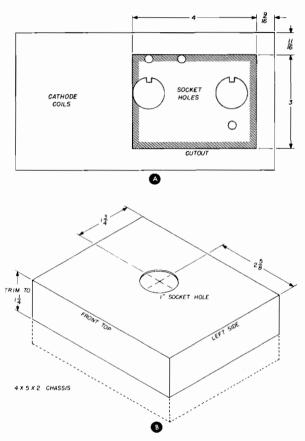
SB-200 chassis modifications to accomodate the 8875. The enclosure cutout for the sub-chassis is shown in A. The modified subchassis for the 8875 socket is shown in B.
